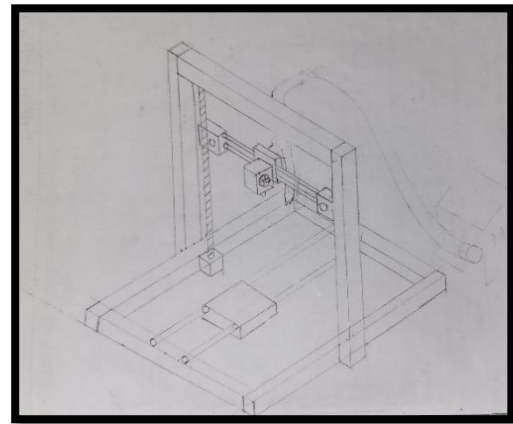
Basic 2D hand sketch showing assembly of aluminium channels
